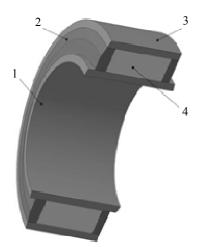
Welded construction of a welded hollow-filled bandage design for a rotary kiln
